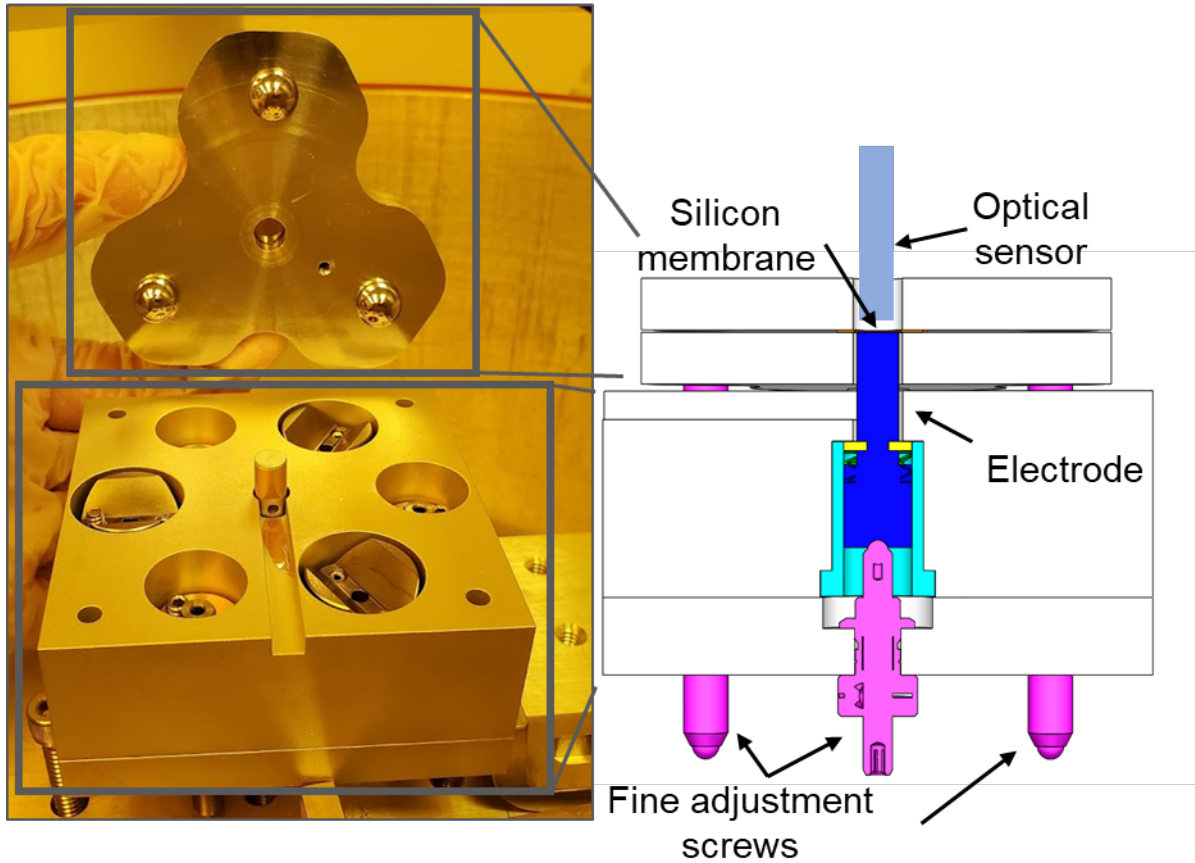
Second mount design with labelled components. The membrane is clamped between two lapped aluminum plates. The bottom plate kinematically connects to the mount base that has the bottom electrode. The electrode is moved with a fine adjustment screw. The whole mount sits on three fine adjustment screws that control tilt, tip, and height of the mount. The optical sensor goes through the upper aluminum plate to measure the membrane.
